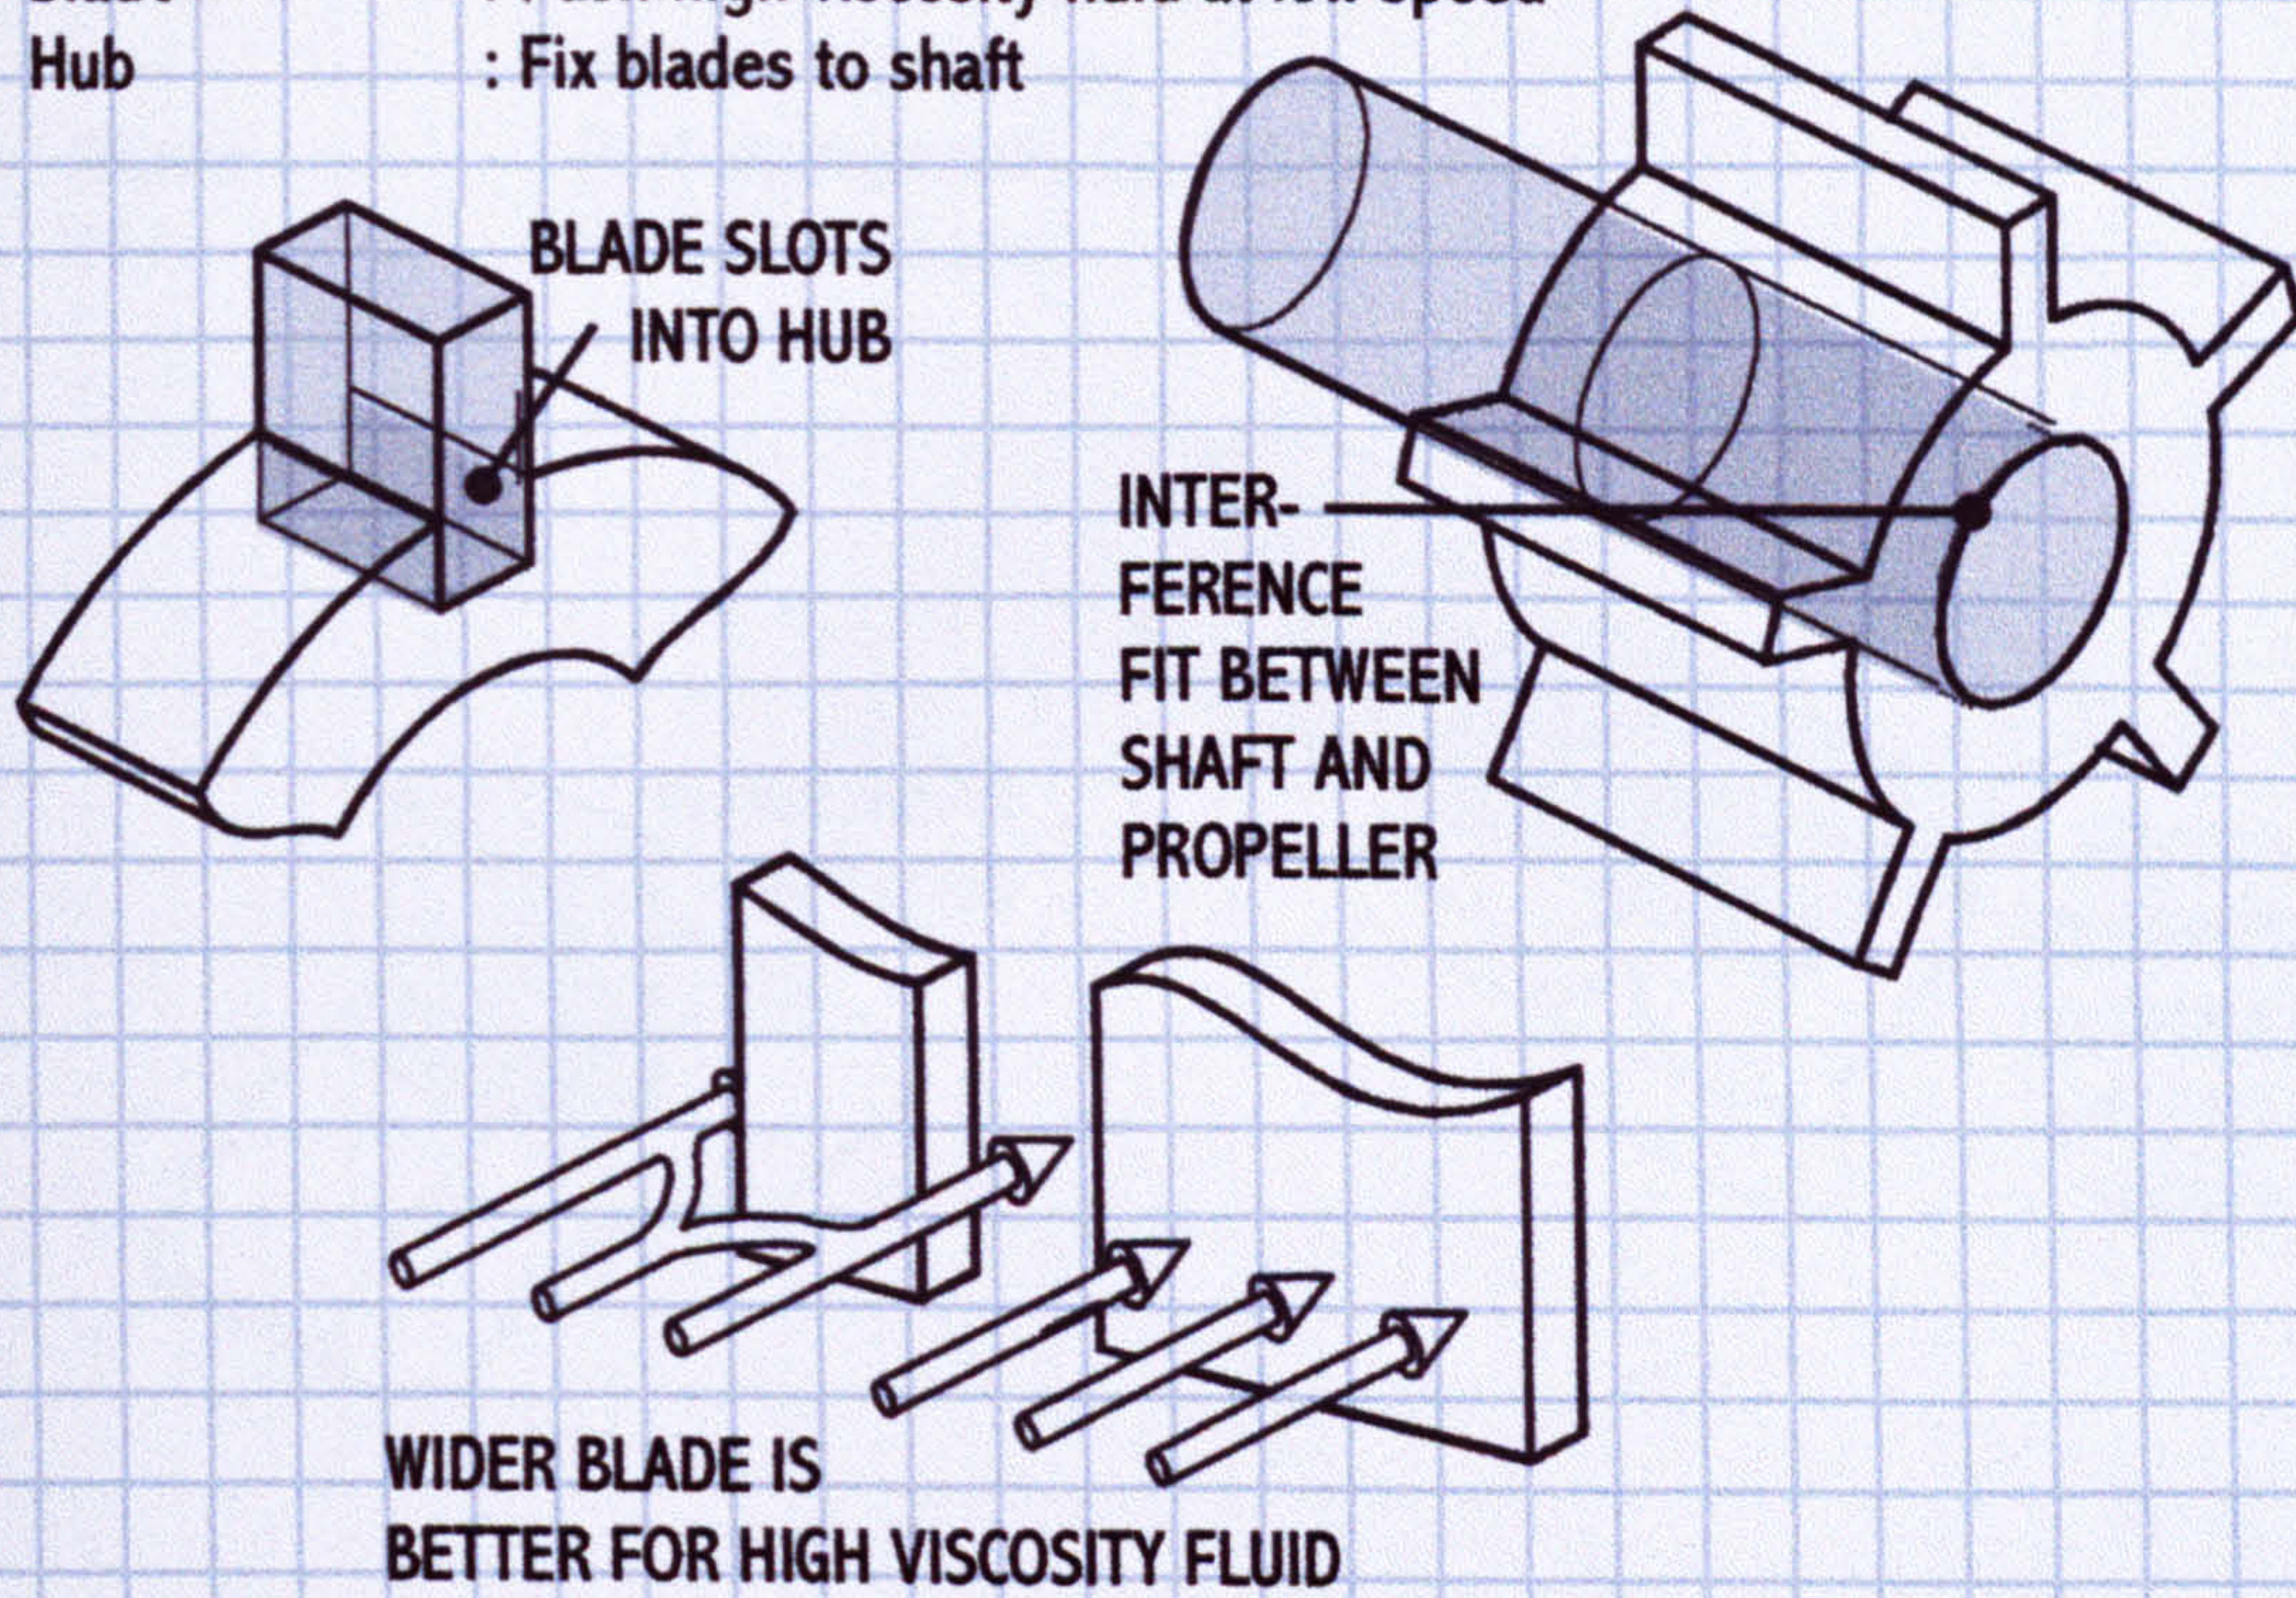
Example Design 'A' for a Prop-Shaft assembly
